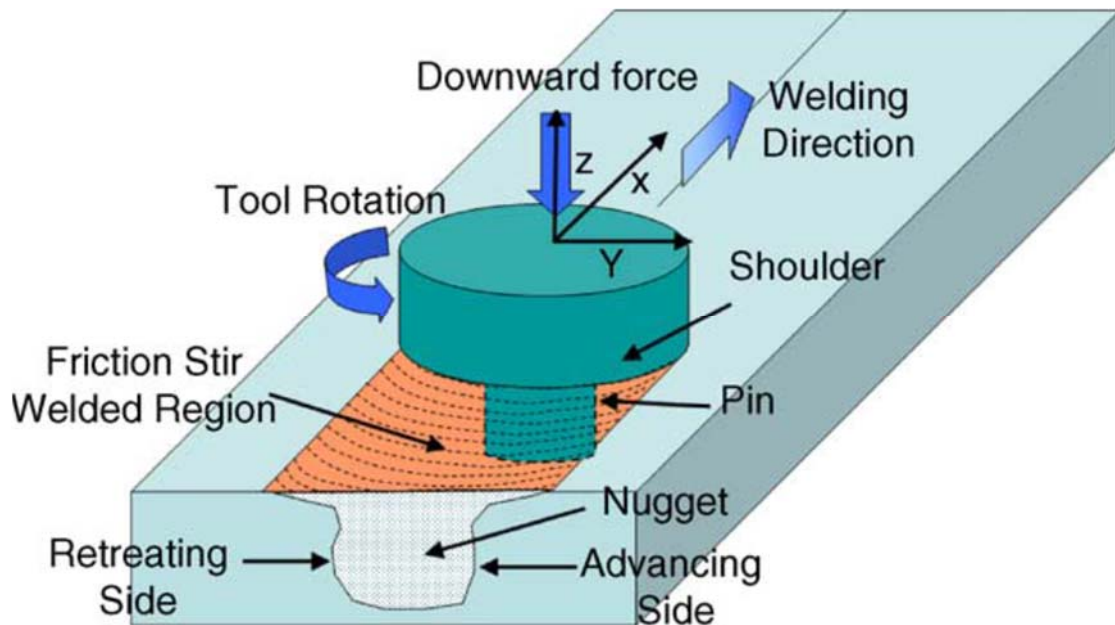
Schematic drawing of friction stir welding ^[20]
